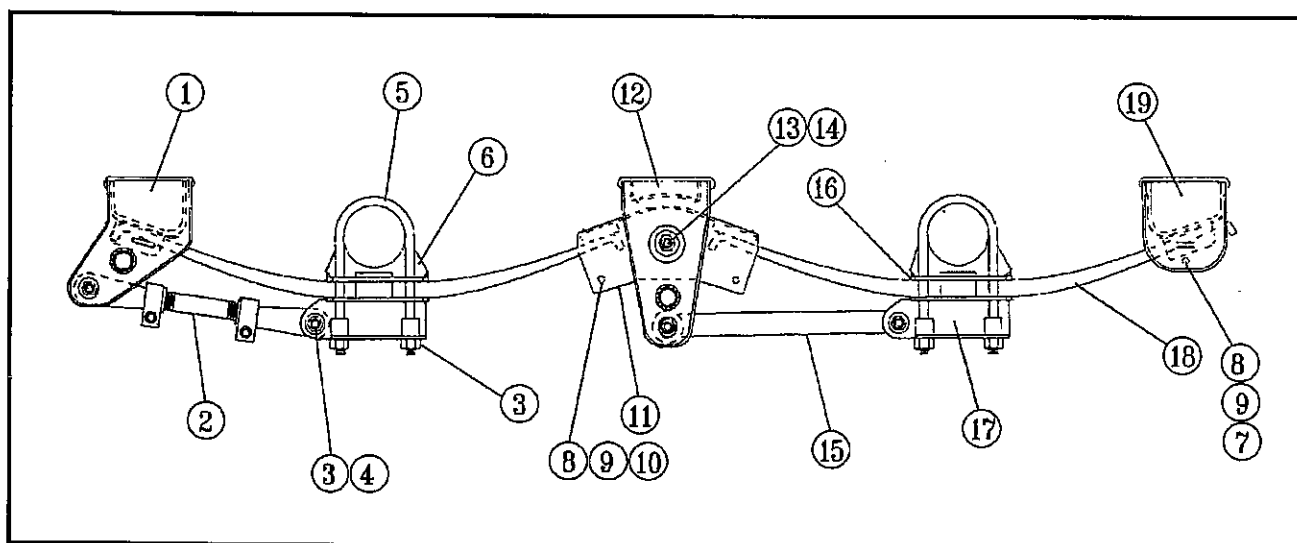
SINGLE LEAF SPRING SUSPENSION
